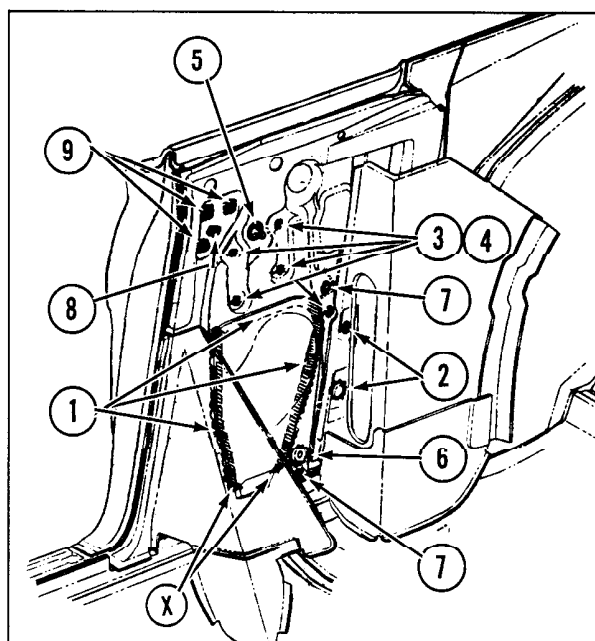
Inner Quarter Panel Sealing ("67" Styles)
